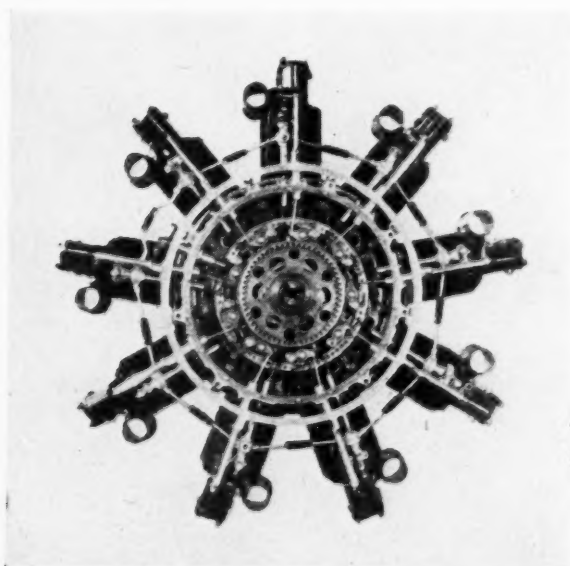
Rear view of Packard aircraft diesel, crankcase cover removed
